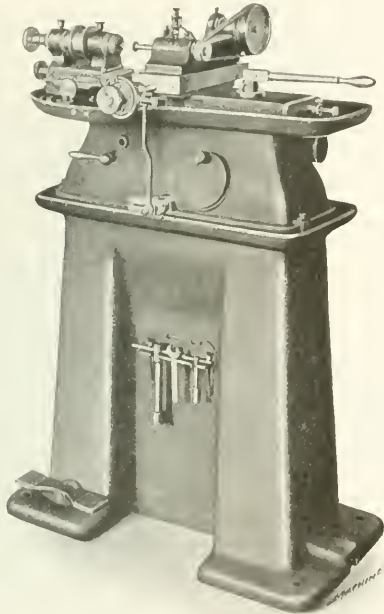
Rivett Automatic Oscillating Grinding Machine
